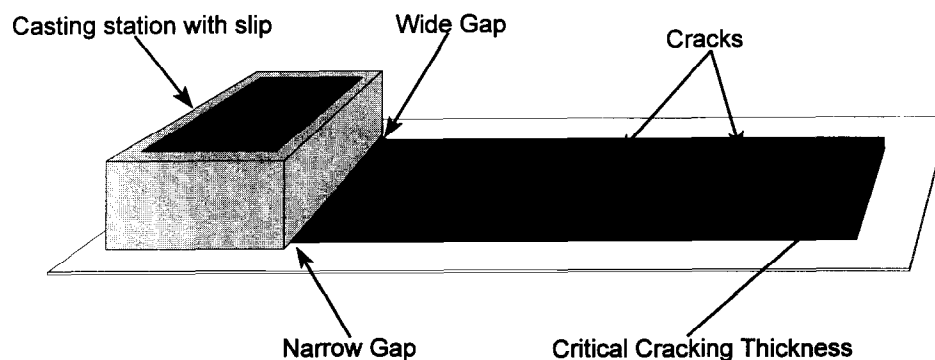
Casting station with sloping gap for checking the Critical Cracking Thickness, CCT.
